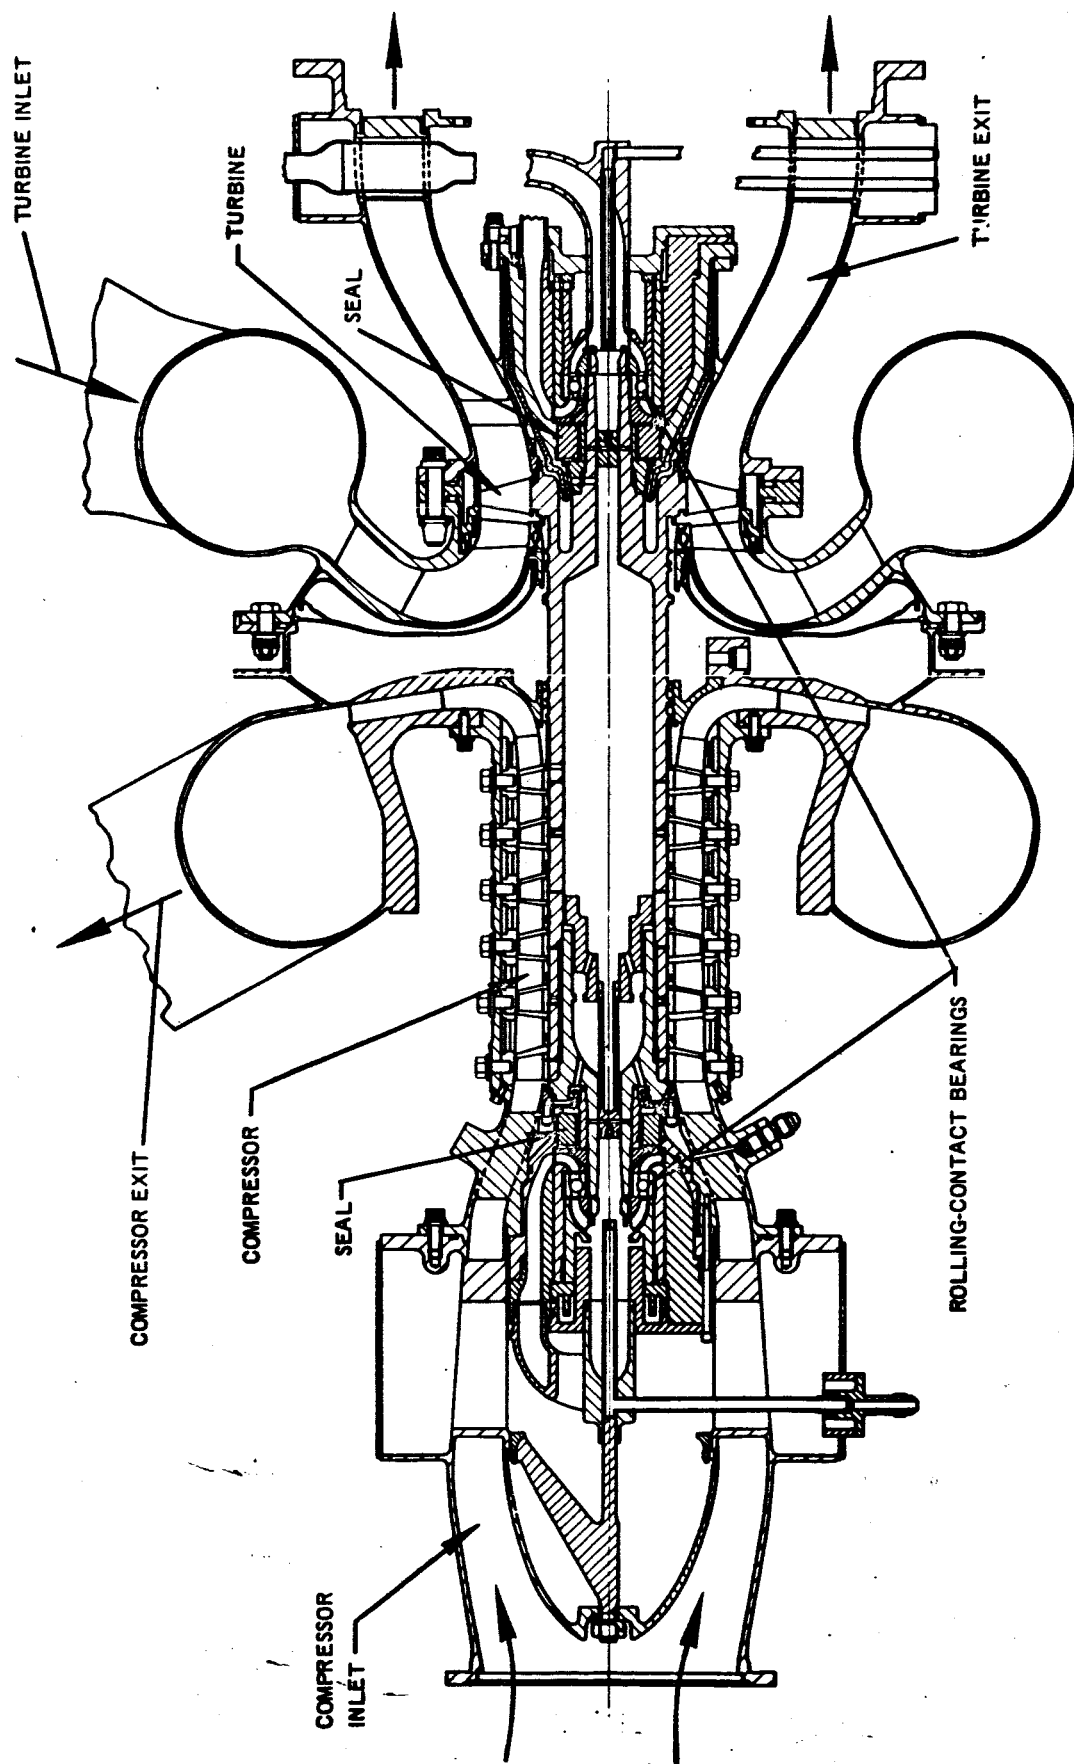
Brayton-Cycle Turbine-Compressor with Rolling-Contact Bearings
